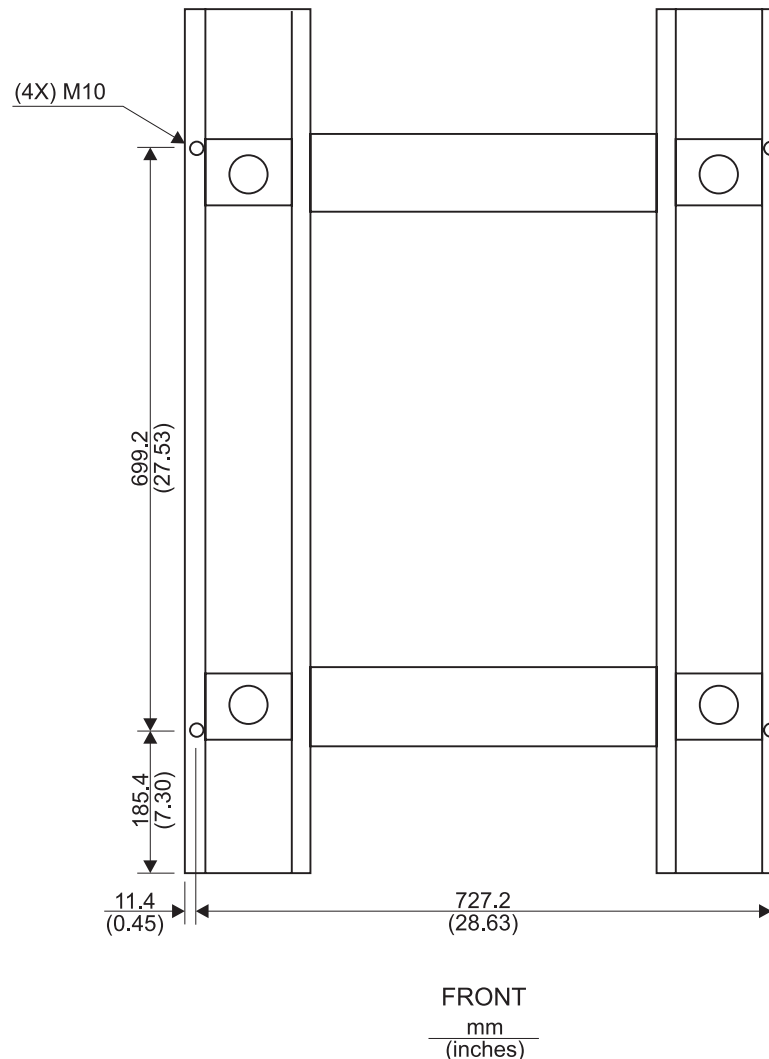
Locations of frame tie-down weld-nuts on 1.93 m frames (bottom view)
